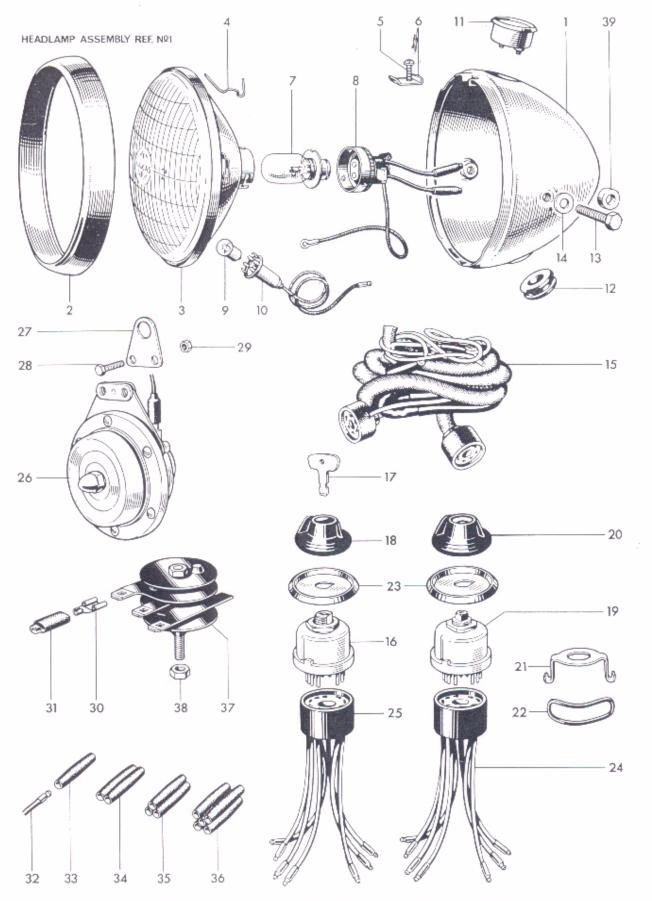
T90 AND T10055 HEADLAMP, WIRING HARNESS AND SWITCHES
